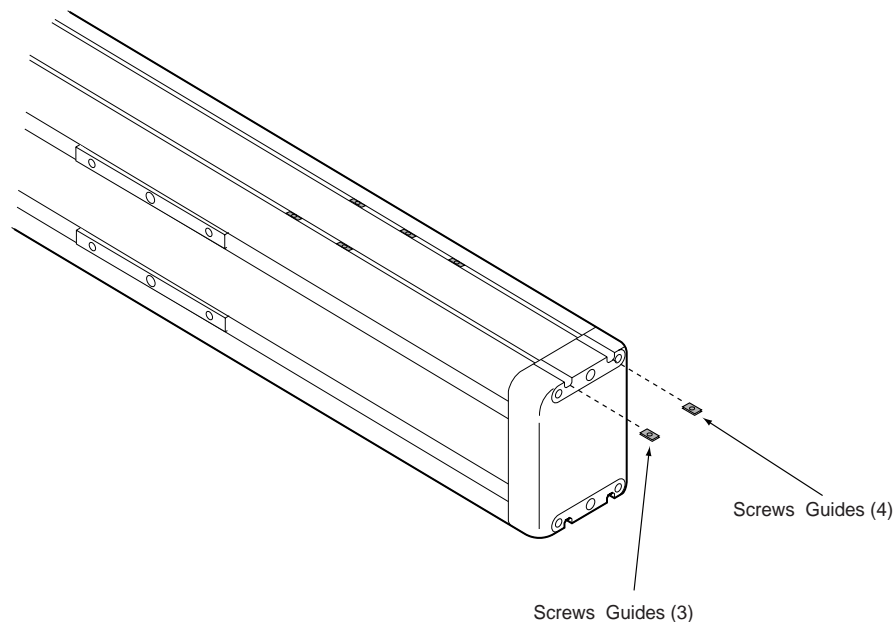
Y-Axis Cable Track Support Bracket Mounting Keys
